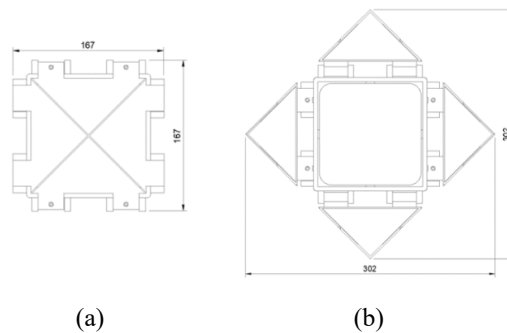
Drawings of dynamic component in (a) closed and (b) open positions with dimensions in mm.
